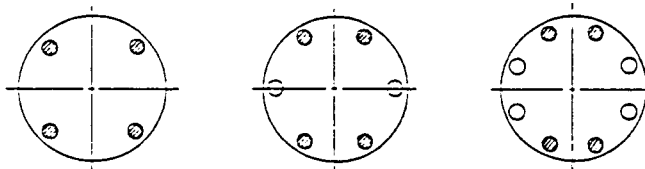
Vertical Mounting (Use four jigs for the lower flange.)
